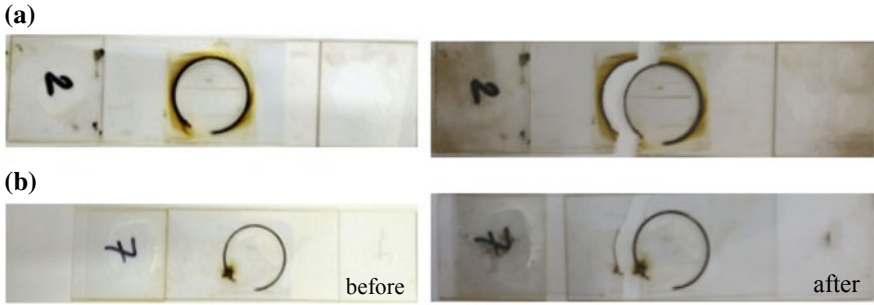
Photographic view of the welded sample before and after the pull test. a Maximum UL for experiment no. 2 and b minimum UL for experiment no. 7
